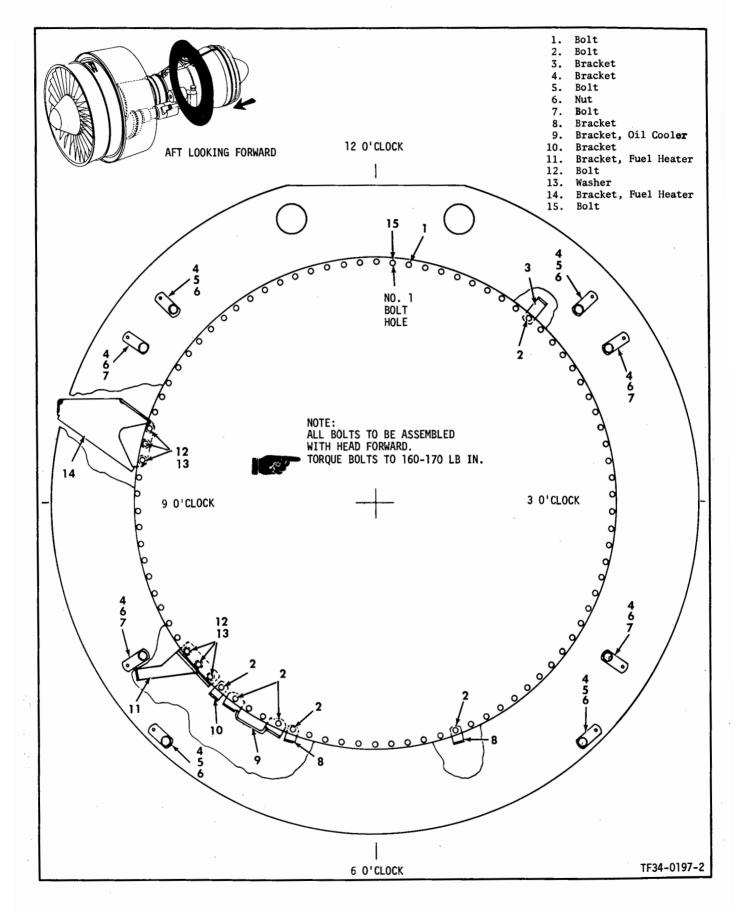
Bolting Diagram - High-Pressure Turbine Casing and Aft Mount Ring
